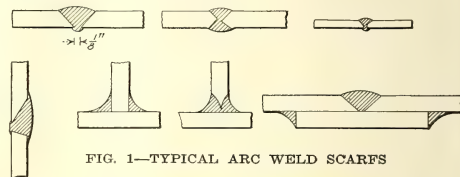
TYPICAL ARC WELD SCARFS
